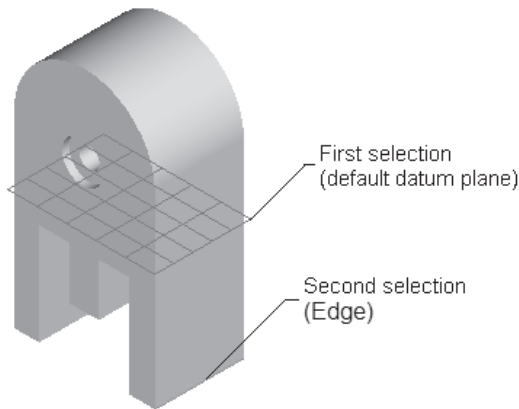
Selecting a datum plane and an edge to create a datum plane
